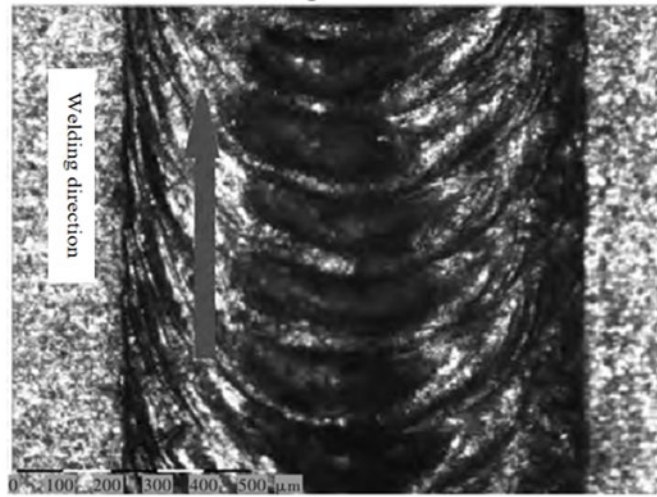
Surface morphology of Cu-Al welding joint^[1].
